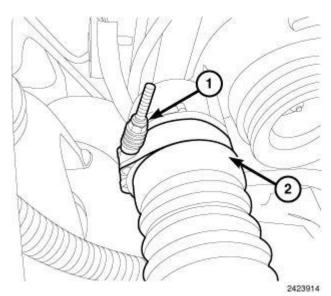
Charge Air Inlet Tube & Clamp Courtesy of CHRYSLER GROUP, LLC
